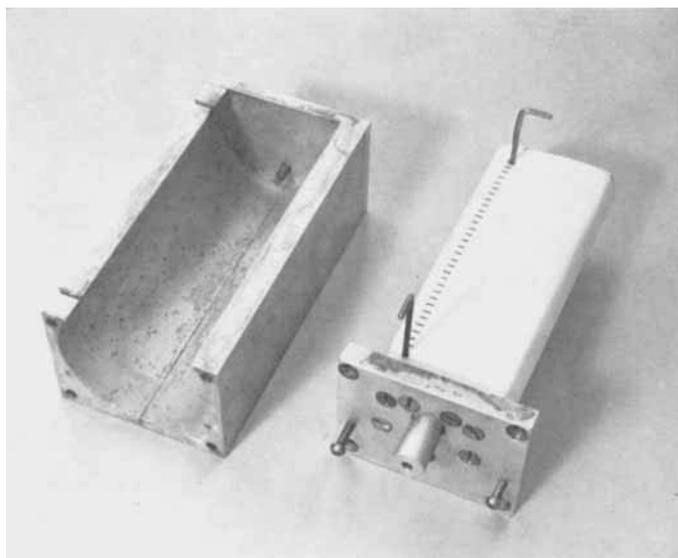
The mould and former for a D-shaped element of internal dimensions 12.5 × 5 × 3.5 cm. The paper covering the former is marked ready for winding the 20 per cent rhodium-platinum wire.
